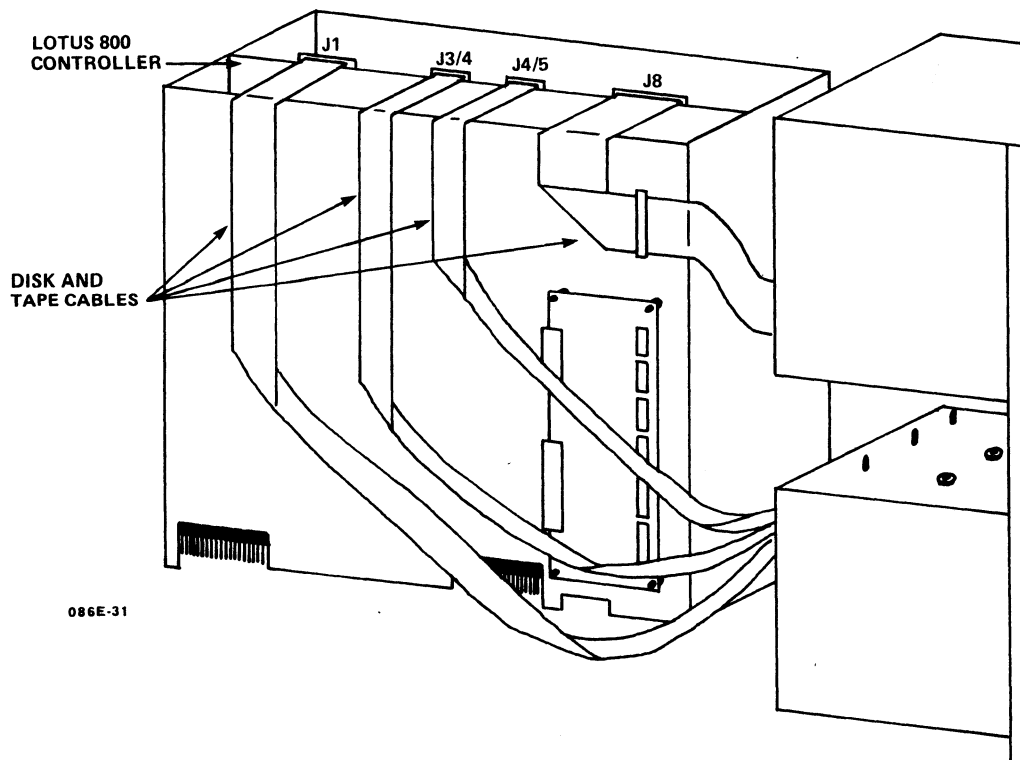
Routing the Disk Drive and Tape Drive Cables
